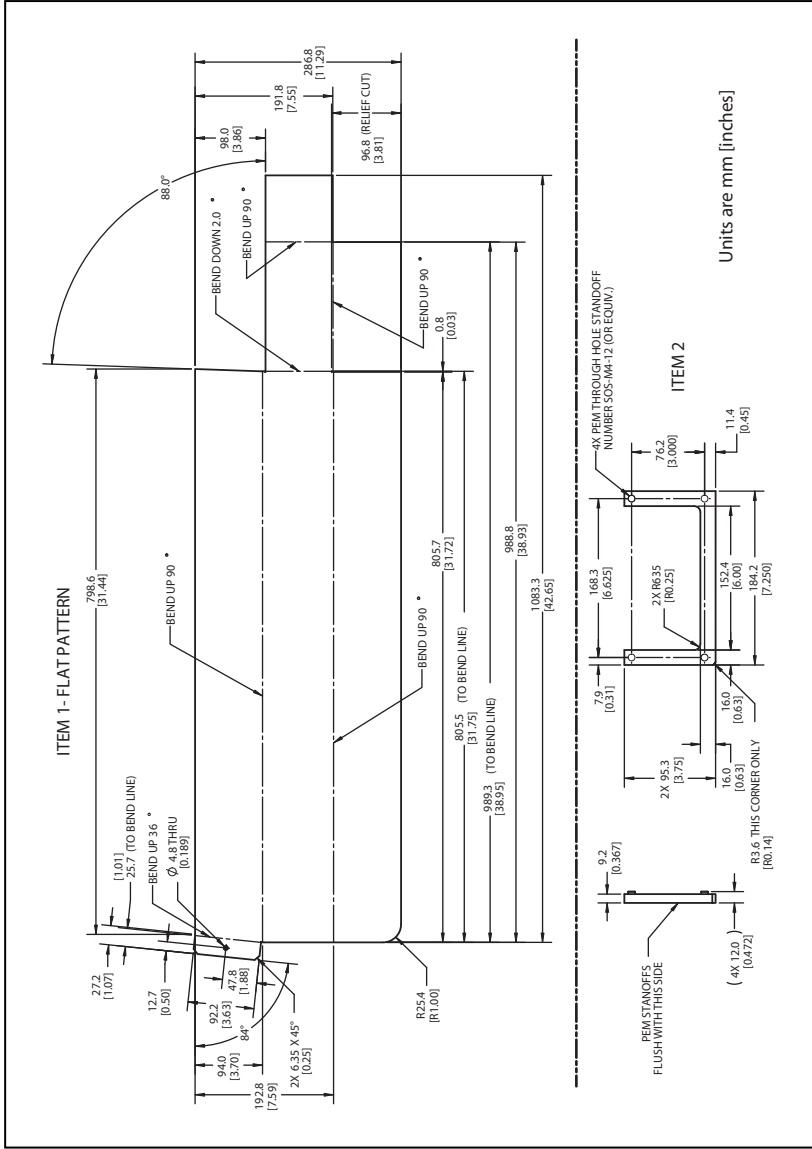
Sample Cable Tray, Dimension Drawing 2 (units are mm [inches])
